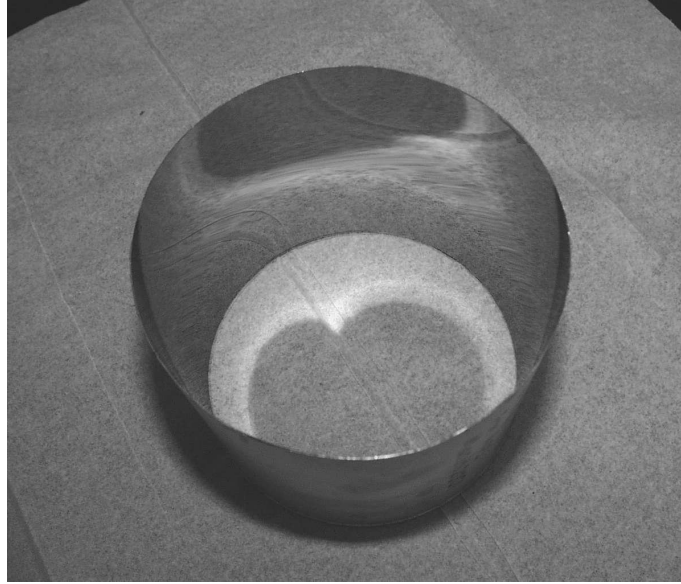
Photograph of multilayer coated IEMP mirror following removal from mandrel and trimming.
